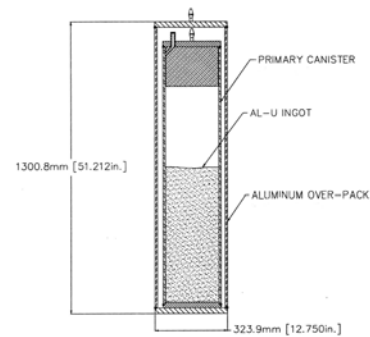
Canister with Melted Fuel Assemblies Inside an Aluminum Over-pack
